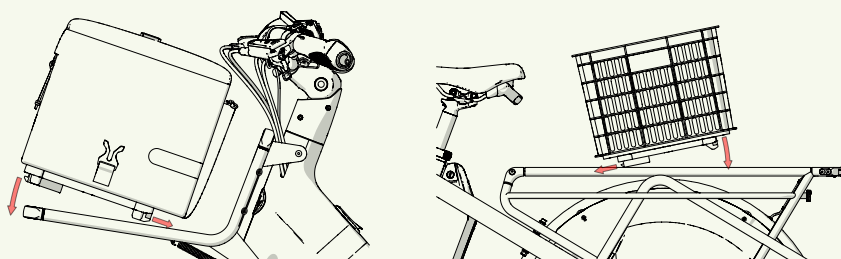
Attach bicycle accessories with integrated MIK adapter plate
